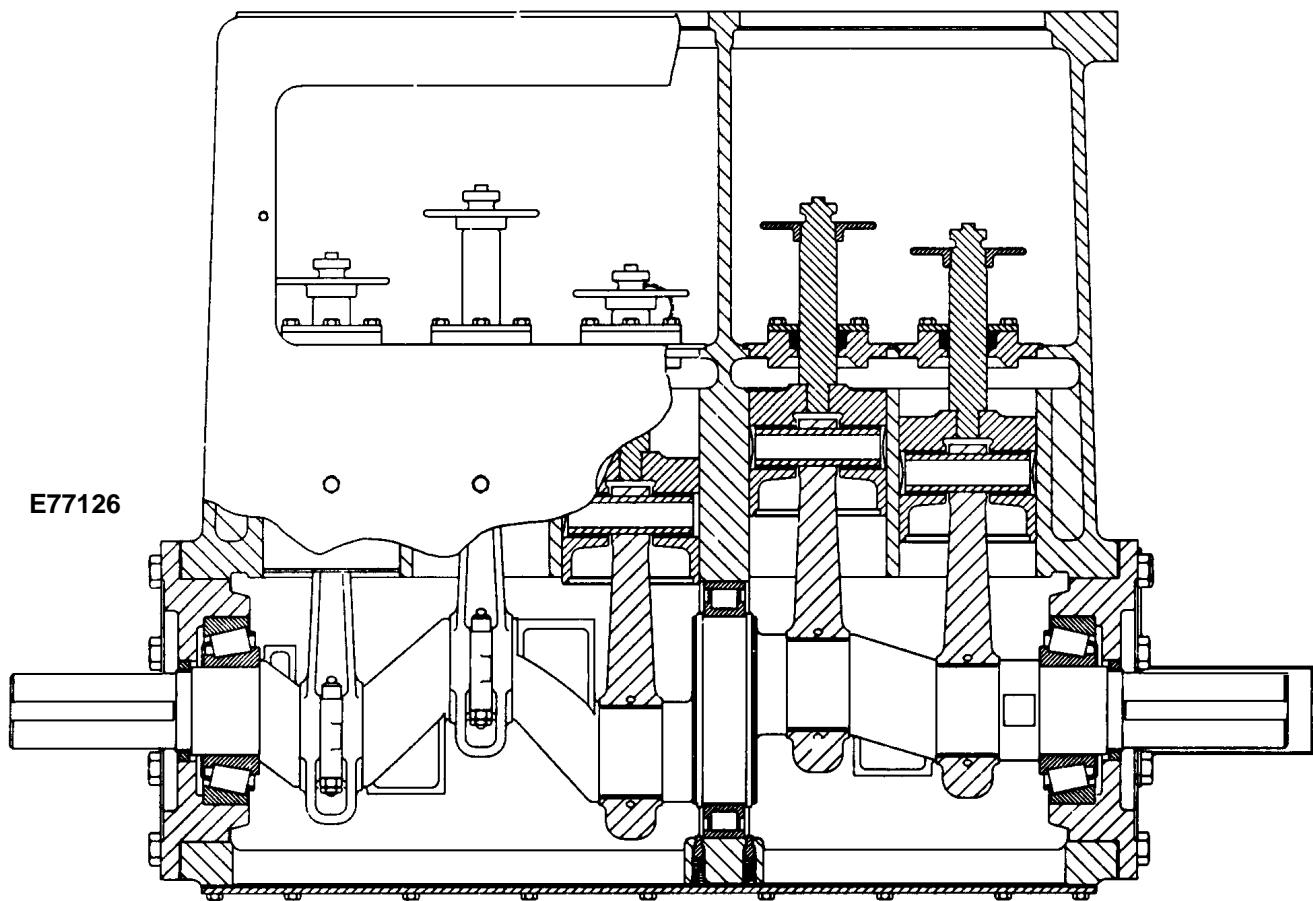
TOP SECTIONAL VIEW OF QUINTUPLEX POWER END SHOWING CRANKSHAFT
